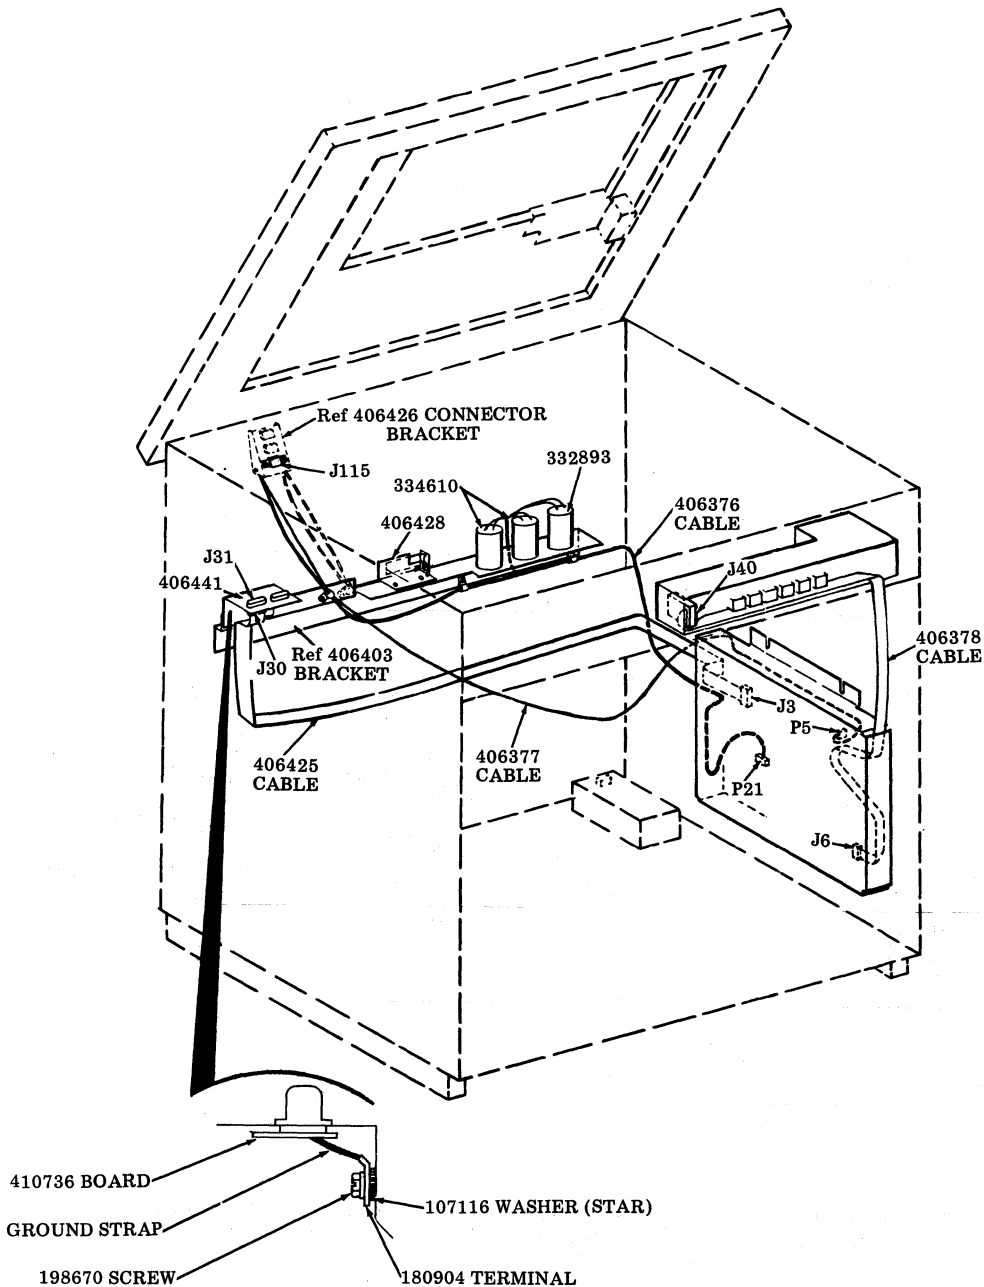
40CAB302 Forms Access Printer Cabinet With Provisions for Integrated Controller (Used With 40C303/AC or 40C303/AD Controller — Early Design)
